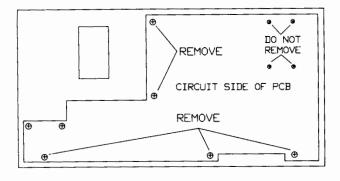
SCSI and HP-IB PCA Mounting Screws.
